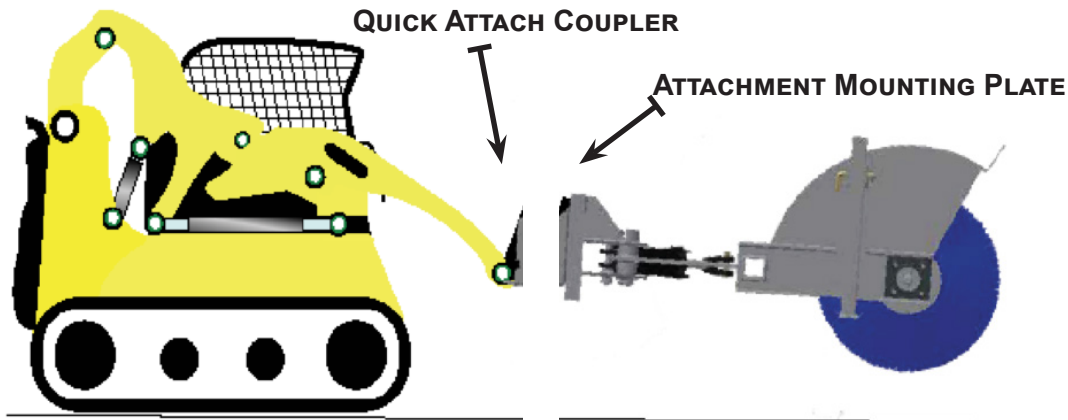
A - SKID STEER QUICK ATTACH COUPLER TO MOUNTING PLATE
